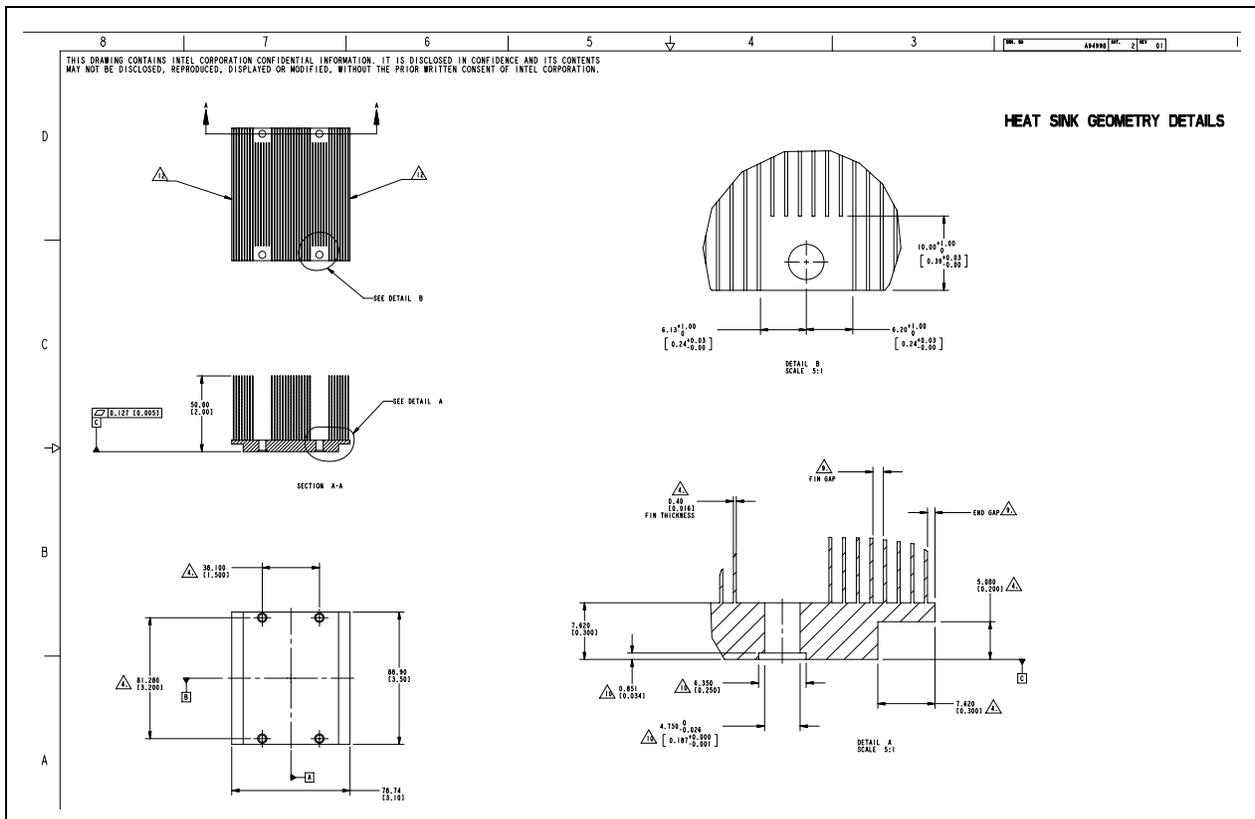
2U Cooling Solution Heatsink (Sheet 3 of 4)
